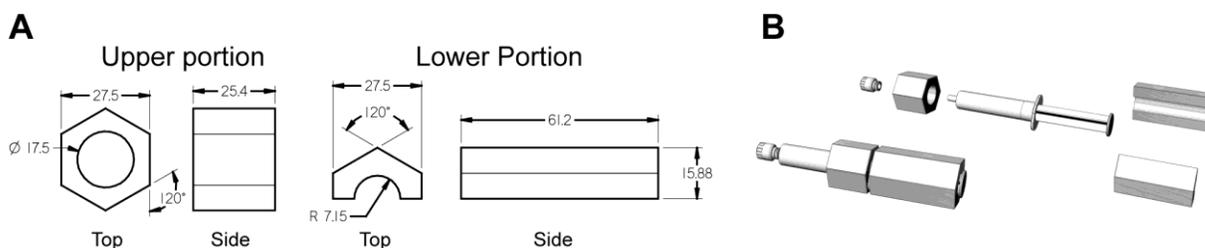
Fixture used for centrifugation of 10 mL Syringes. A. Scale drawing of the parts. Dimensions are in millimeters and degrees. B. A 3D model of the fixture and syringe showing assembled and exploded views.
